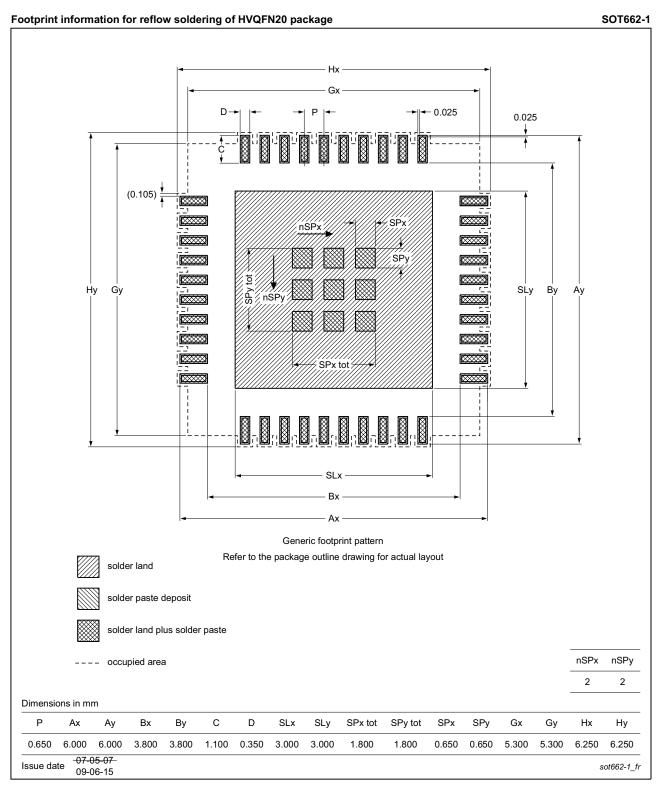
PCB footprint for SOT662-1 (HVQFN20); reflow soldering
